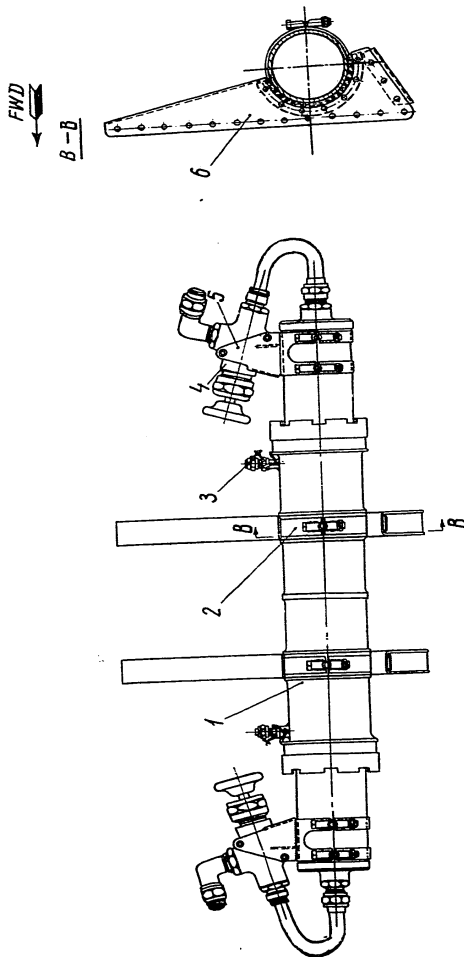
INSTALLATION OF SPRING DAMPER ON FRAME N44
